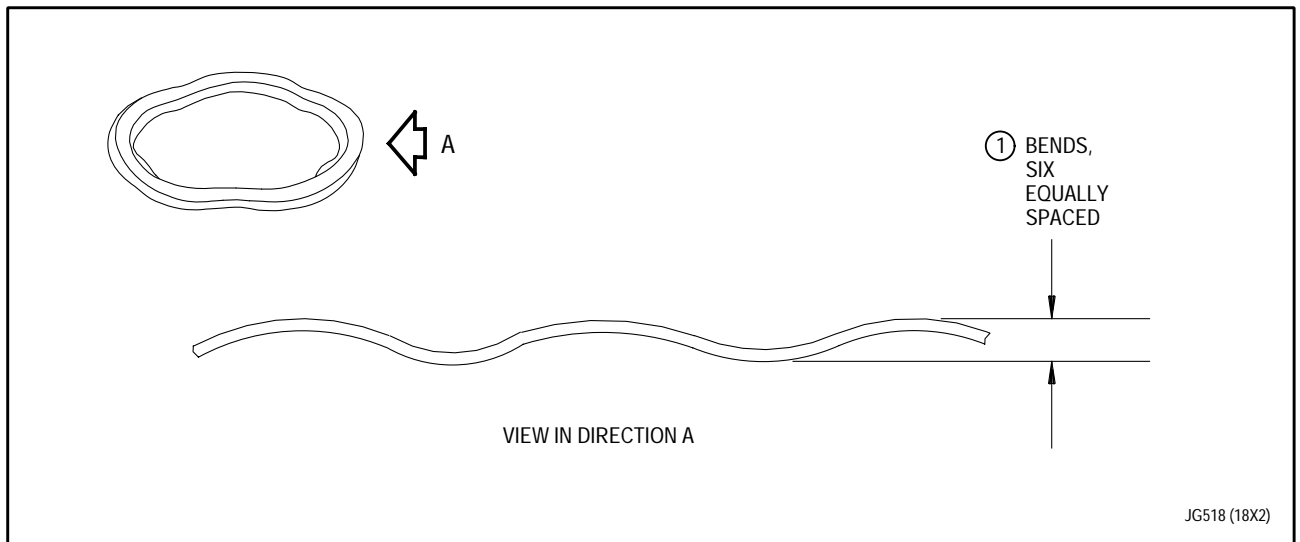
No. 3 Bearing Rear Seal Assembly Washer - Inspection (Sheet 1 of 2)
